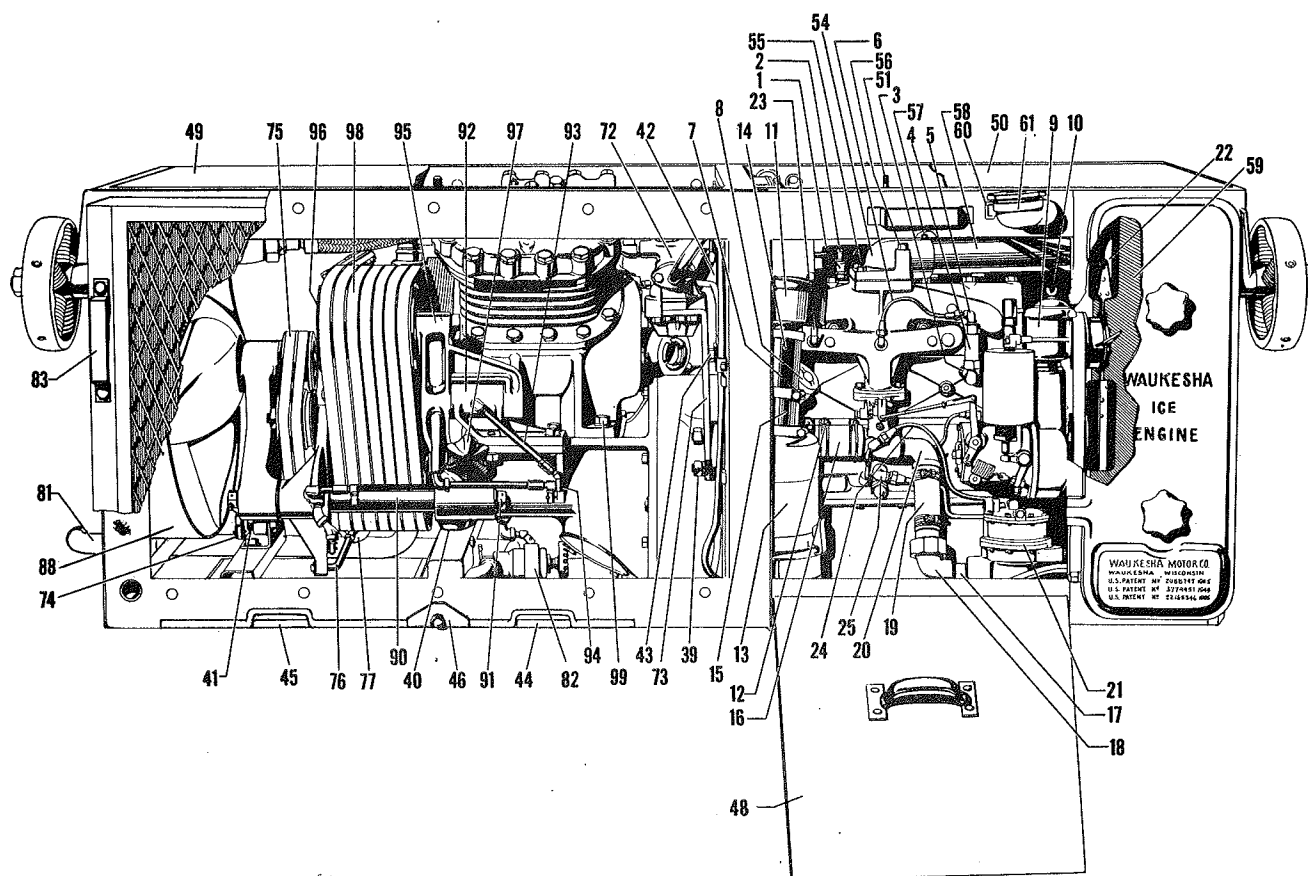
CARBURETOR SIDE OF ICE ENGINE UNIT
